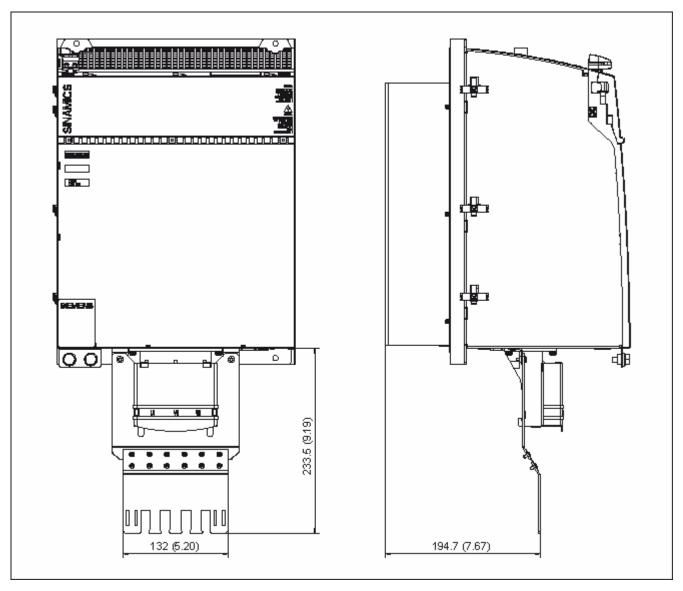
Dimension drawing of shield connecting plate on a 300 mm component with external air cooling, all dimensions in mm and (inches)
